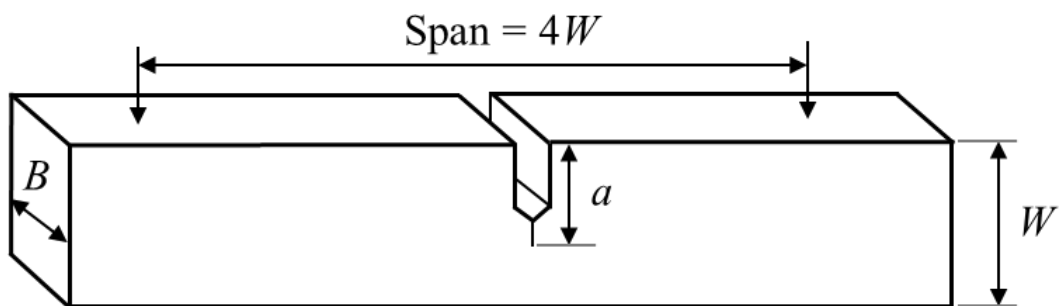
Standardised single edge notched bend (SENB) test specimen
